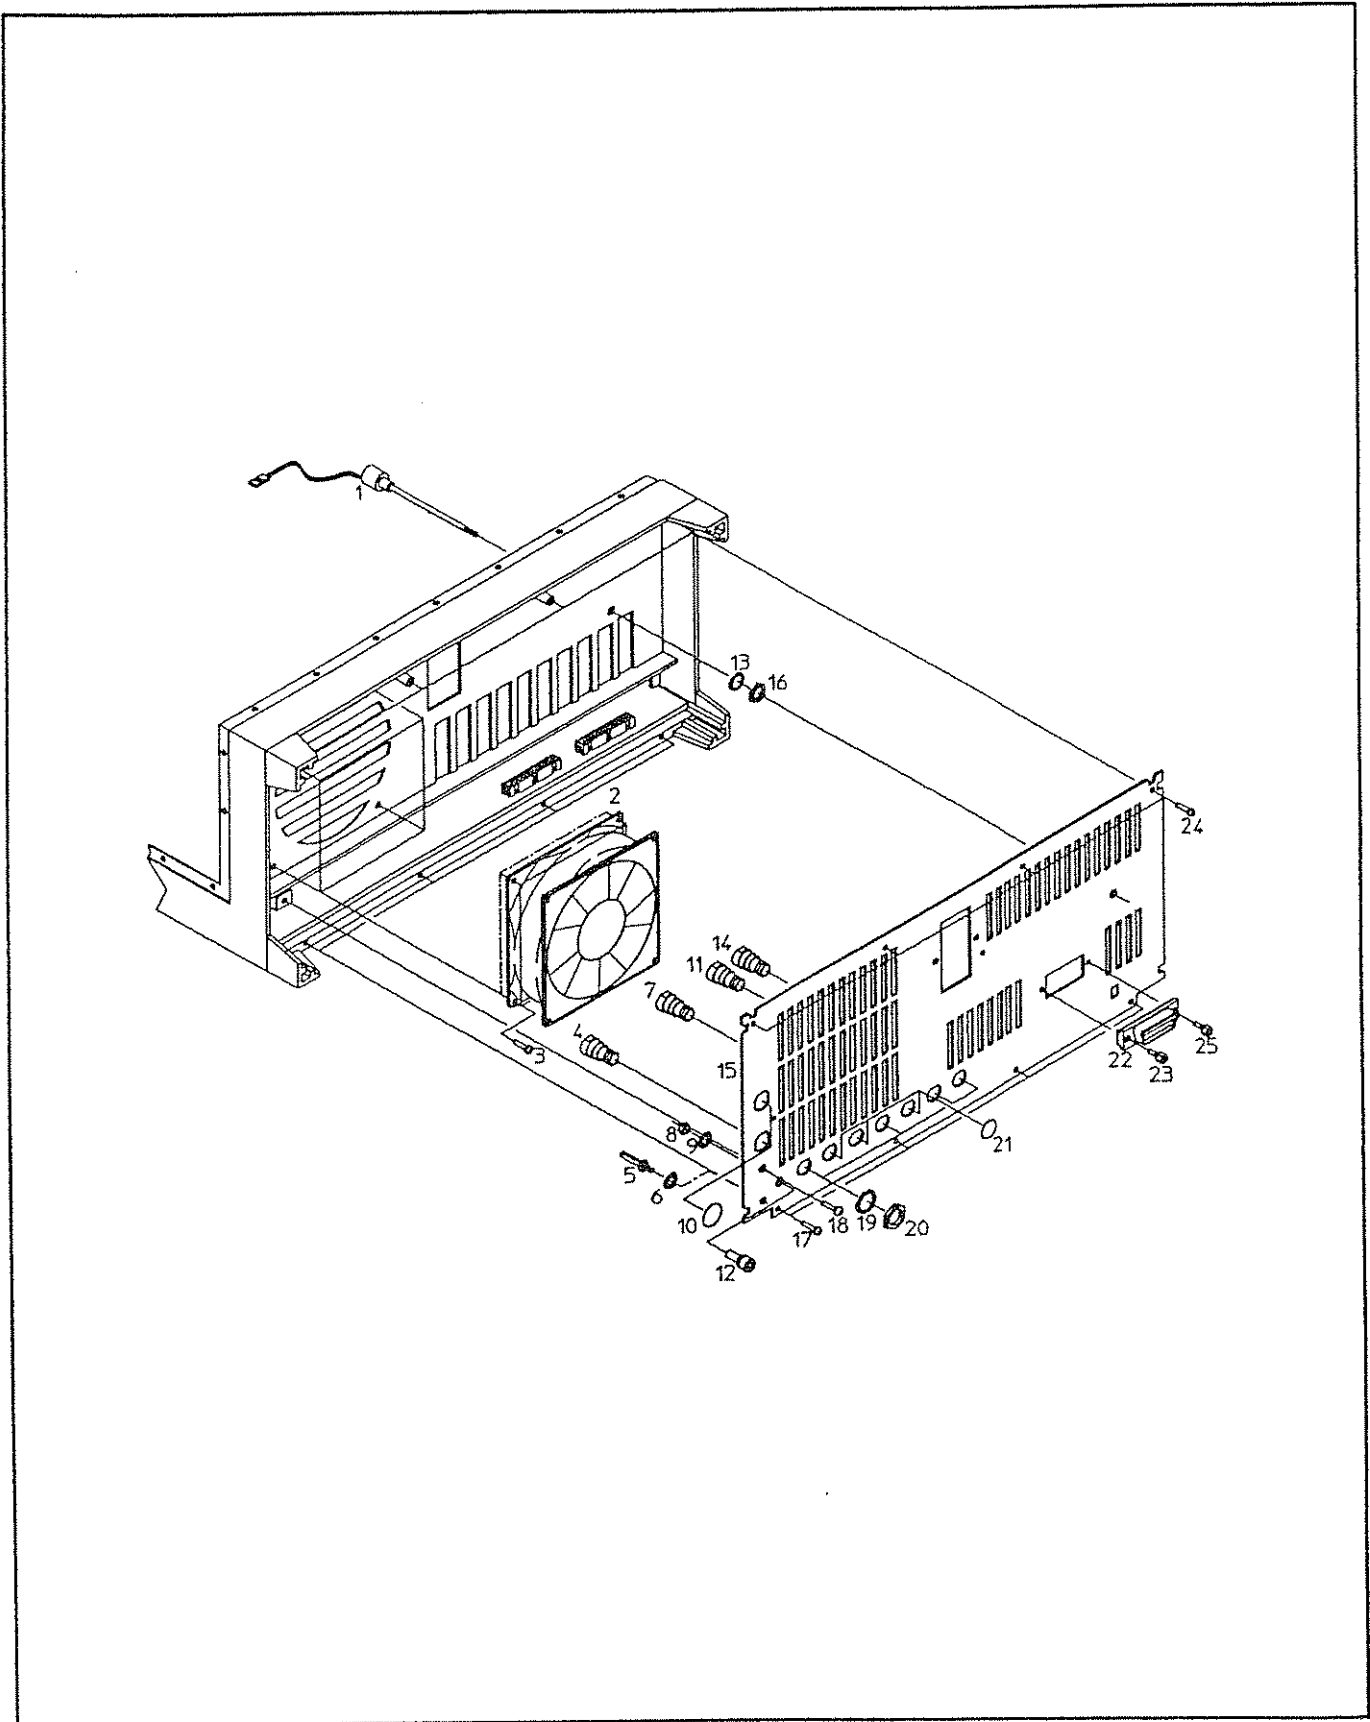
Rear Panel Illustrated Parts Breakdown
